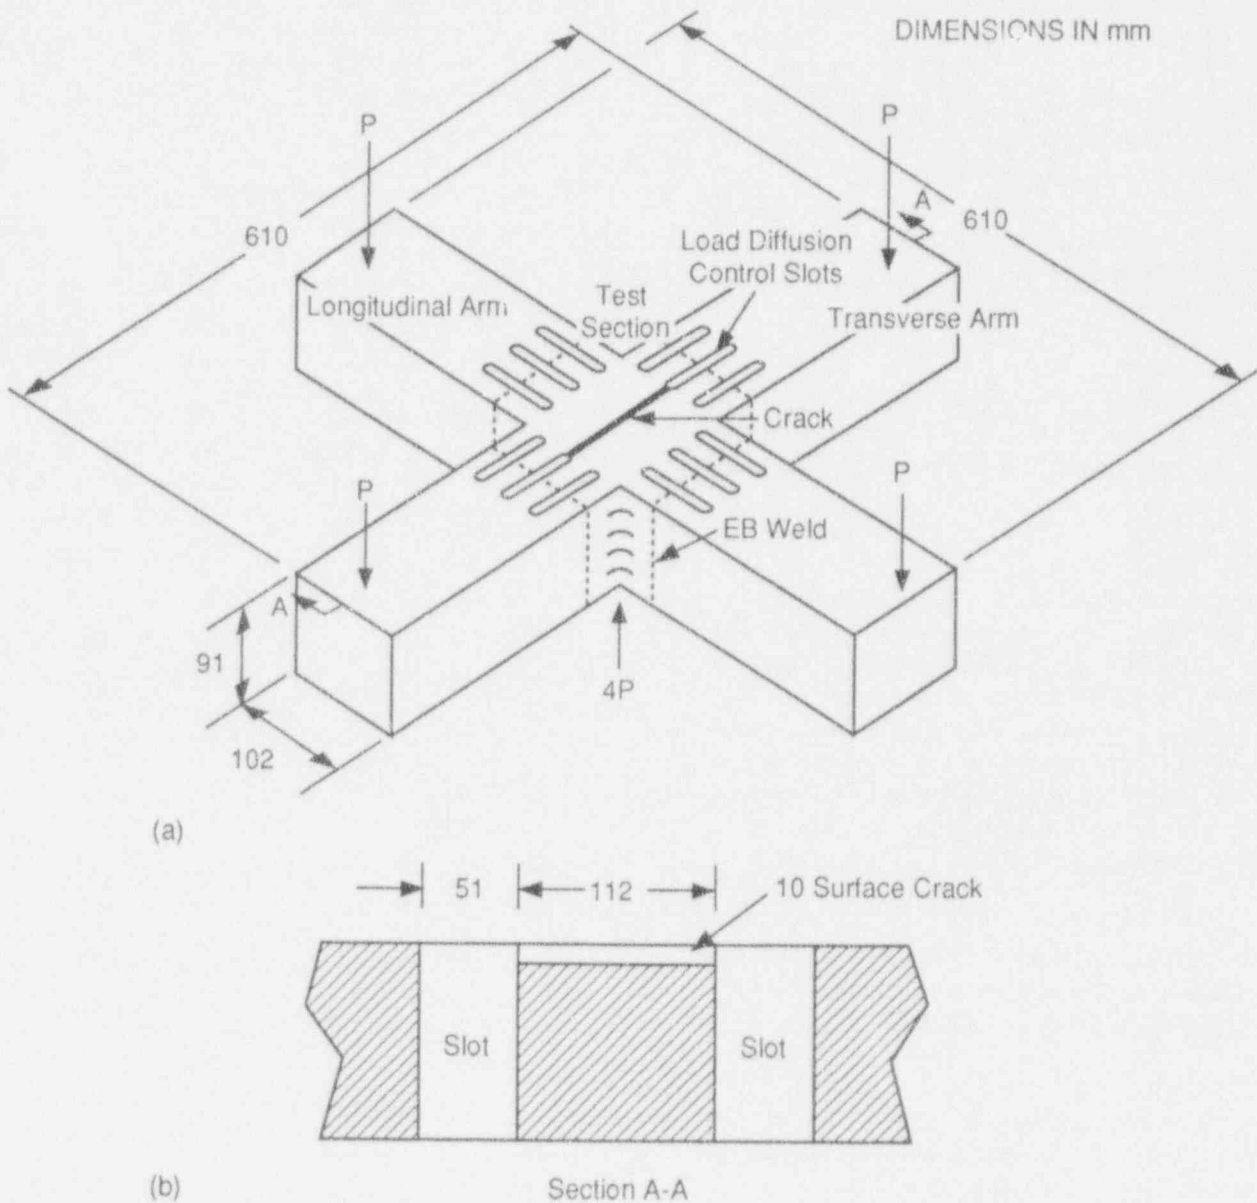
Cruciform bend specimen used in HSST biaxial testing program: (a) dimensions of cruciform specimen and (b) detail of crack plane
